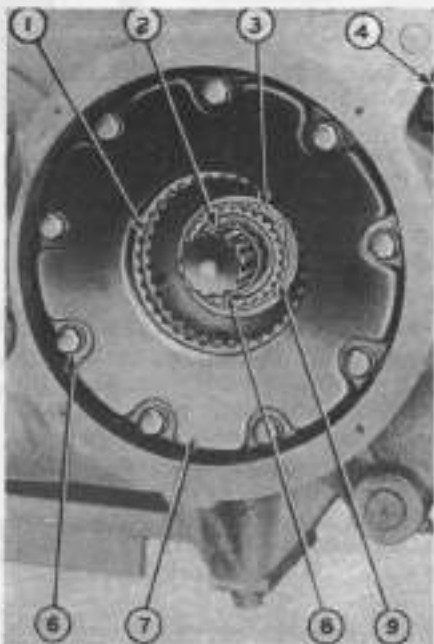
Series 44 live power take-off clutch view with the housing cover and adapter gear removed.
